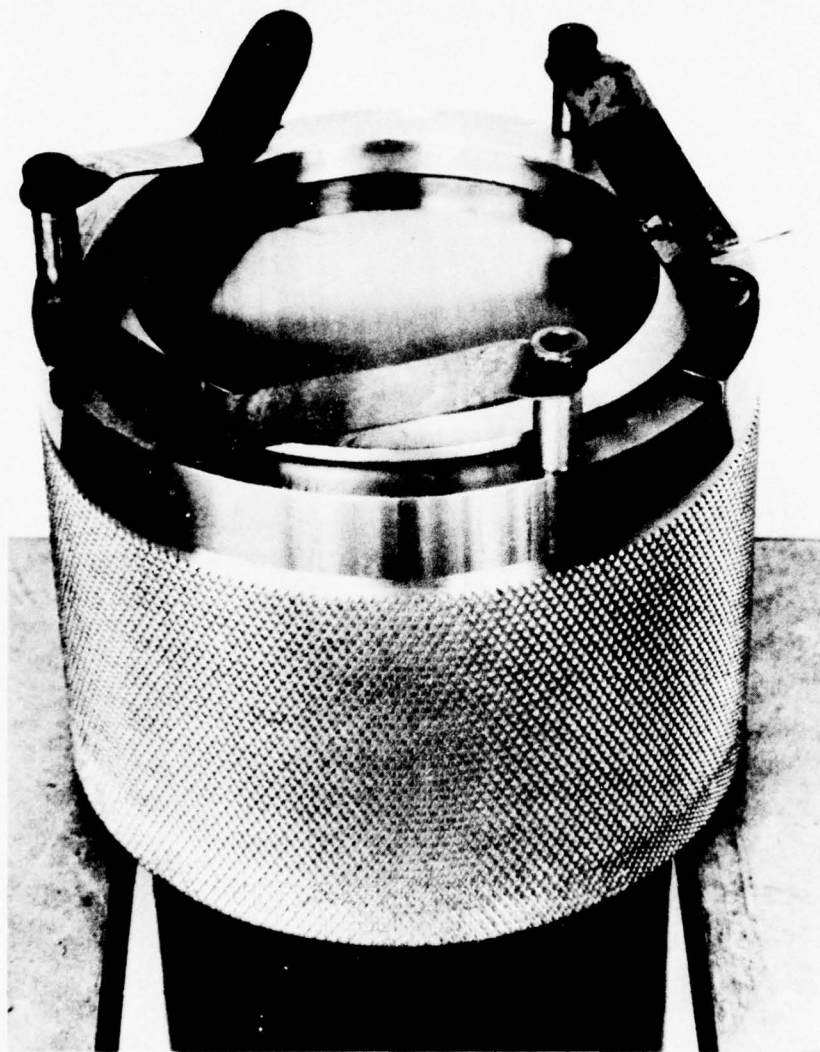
Photograph of assembly corresponding to Fig. 3.
